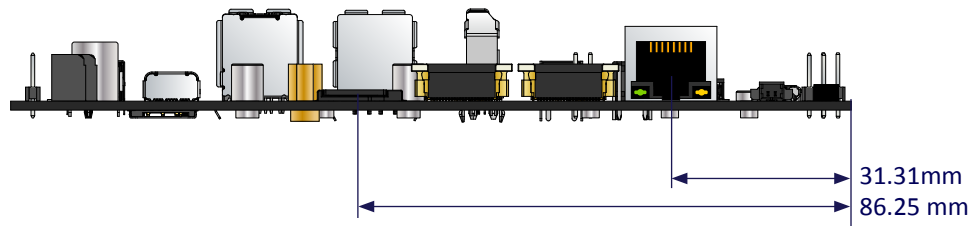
External I/O dimensions of the VIA AI Transforma Model 1 board (back coastline I/O)
